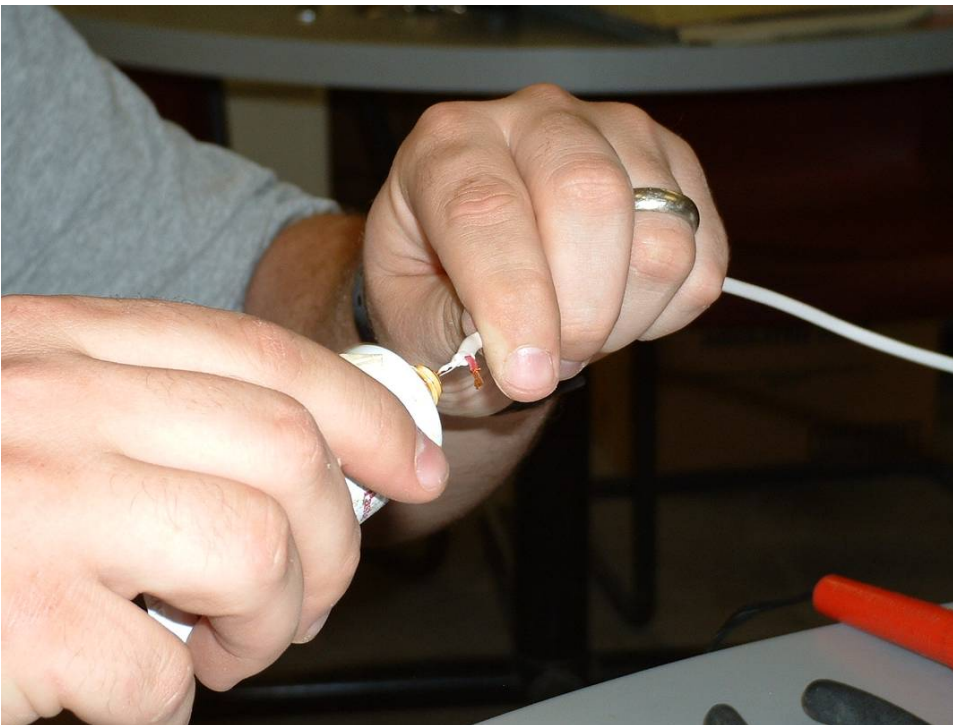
Dipping the ends of the wires into the Rosin Soldering Flux tube
